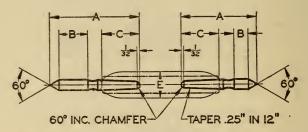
Plain cylindrical plug gages, above 0.059 to 0.150 inch, inclusive
